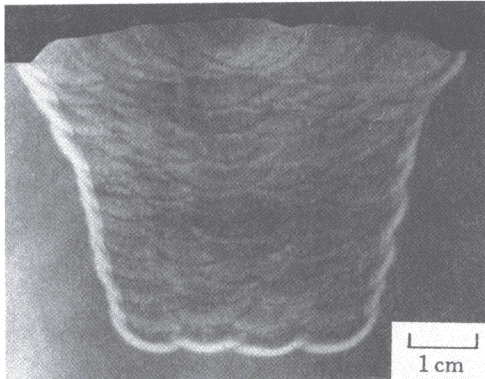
Optical macrograph of the multipass weld studied in this work.
